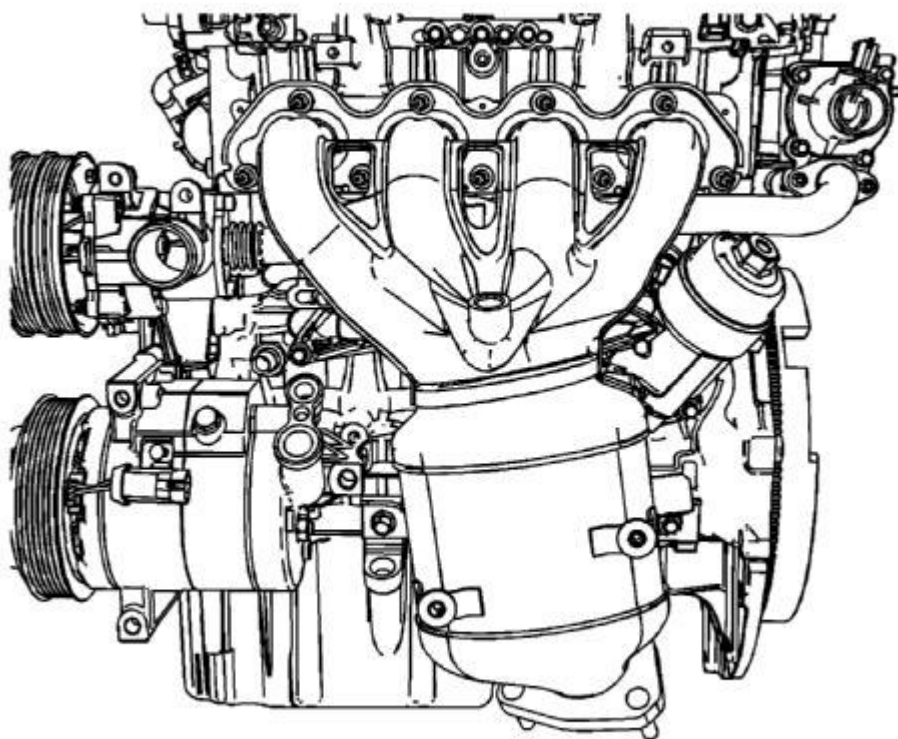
View of Exhaust Manifold And Catalytic Converter
